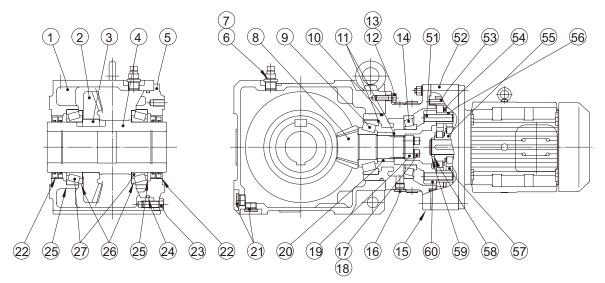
Type LHYM (Gearmotor), (Example: Frame size 4C145-Y1)
